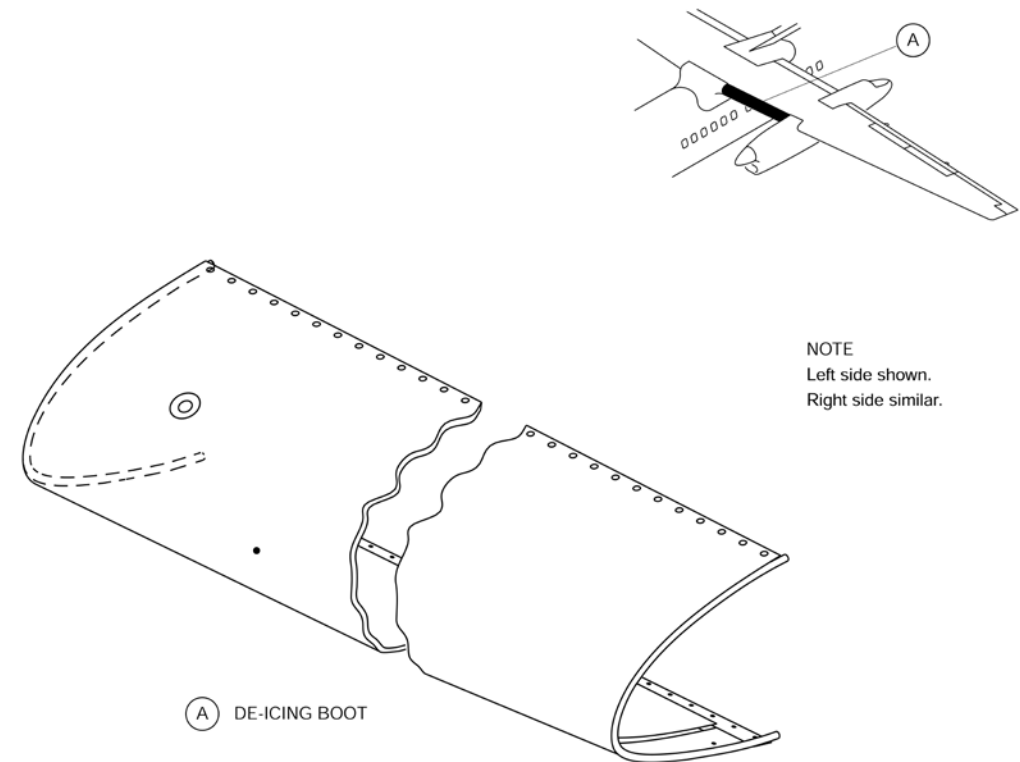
Inboard Wing - De-Ice Boots and Hoses
